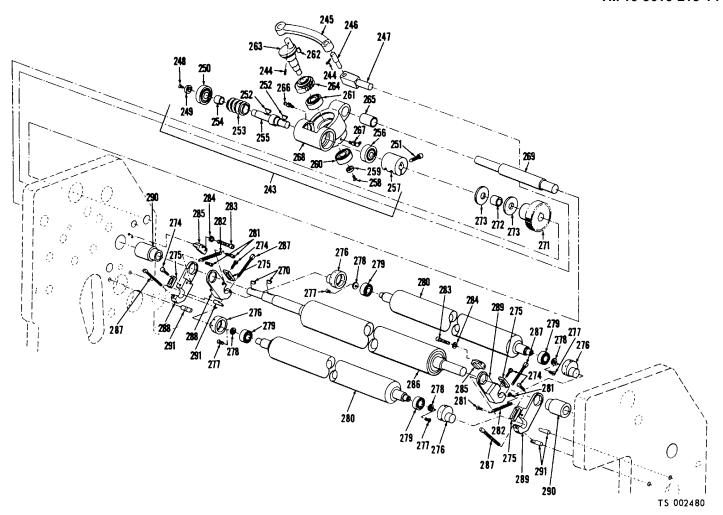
Ink motion assembly (Sheet 8 of 8).
